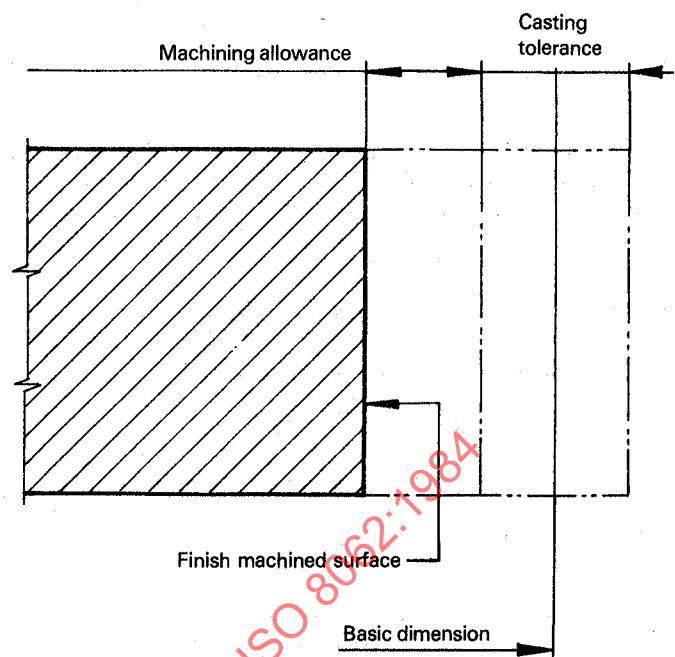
Relationship of component with machining allowance showing the tolerance symmetrically disposed about the basic dimension
